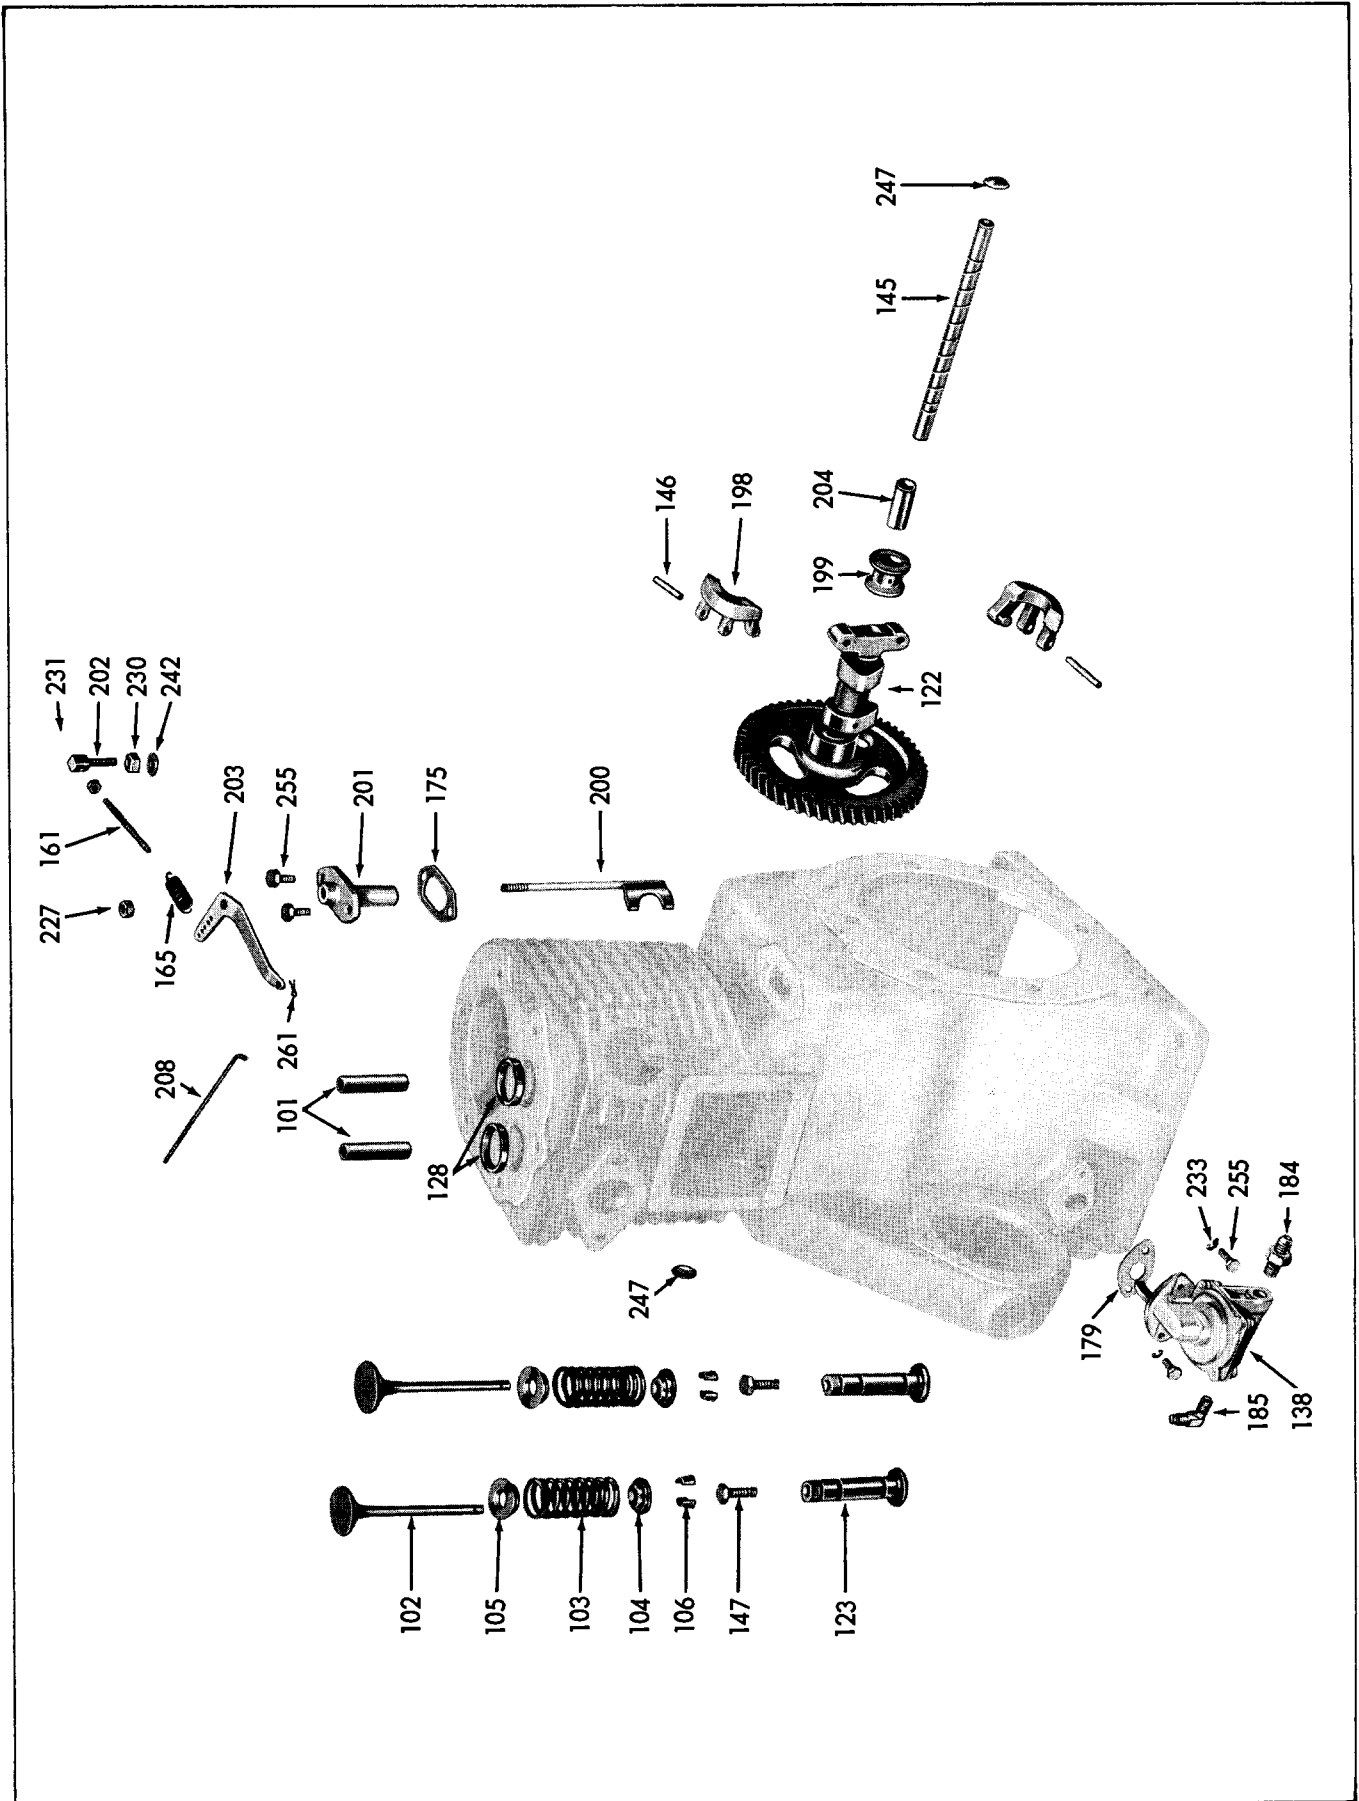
, VALVES, GOVERNOR, FUEL PUMP AND CAMSHAFT GROUP
